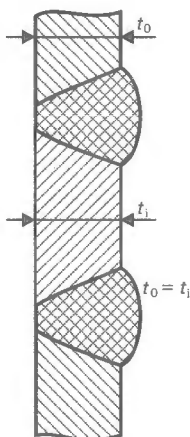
Annular test sample: t_0 — plate thickness; t_i — insert thickness
